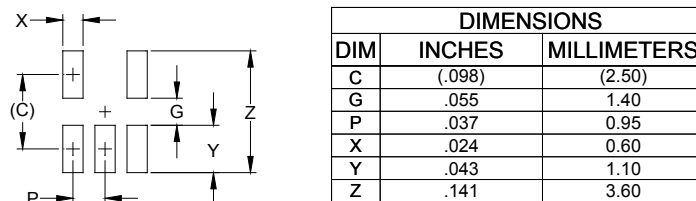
Recommended PCB Top & Bottom Layer Layout
